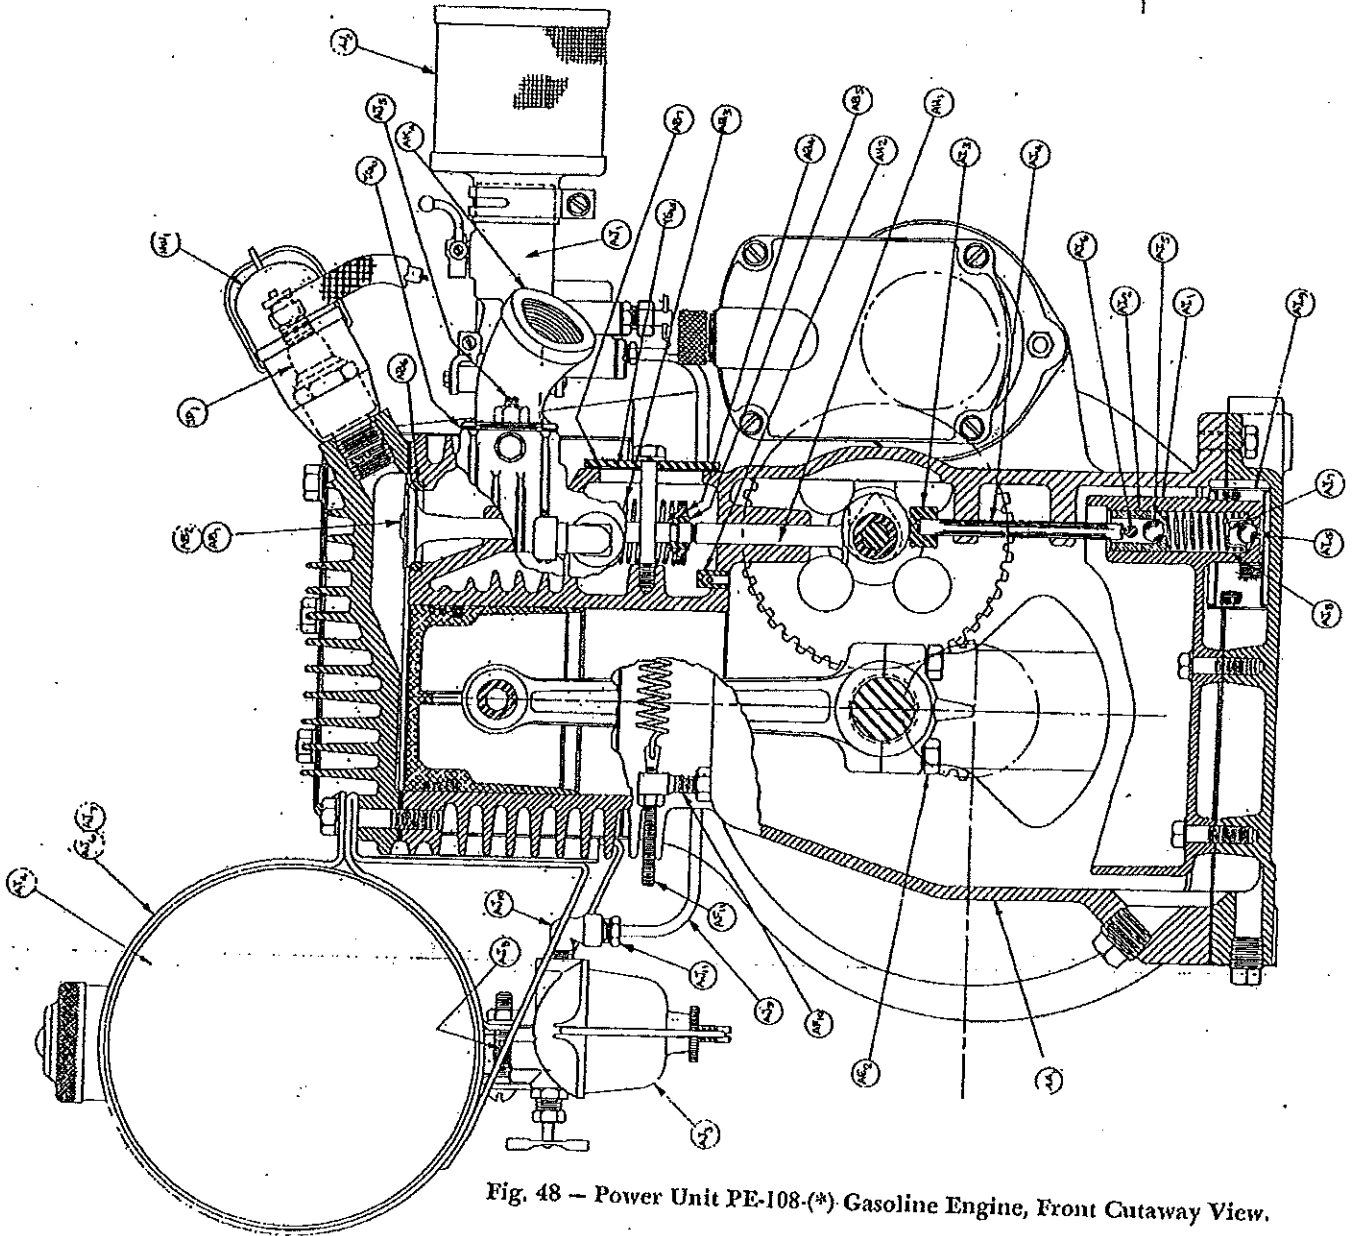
Power Unit PE-108(*) Gasoline Engine, Front Cutaway View.
